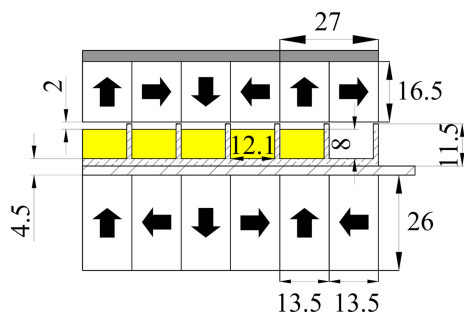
(Color online) Dimensions of the double PM layers coreless machine.
